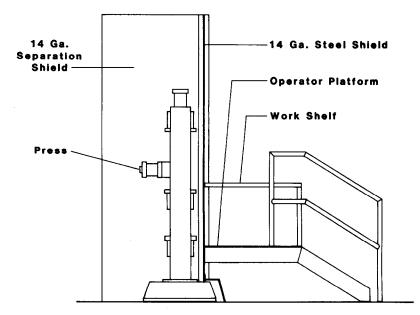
Shielding for consolidation press - Cross section of bay showing press, shield, and platform.
